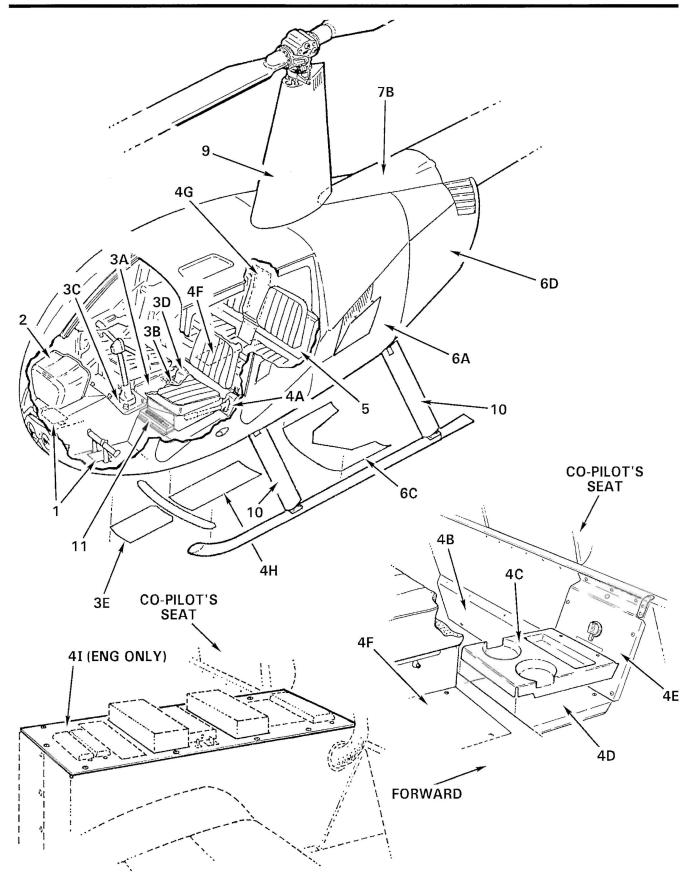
ACCESS AND INSPECTION PANELS
